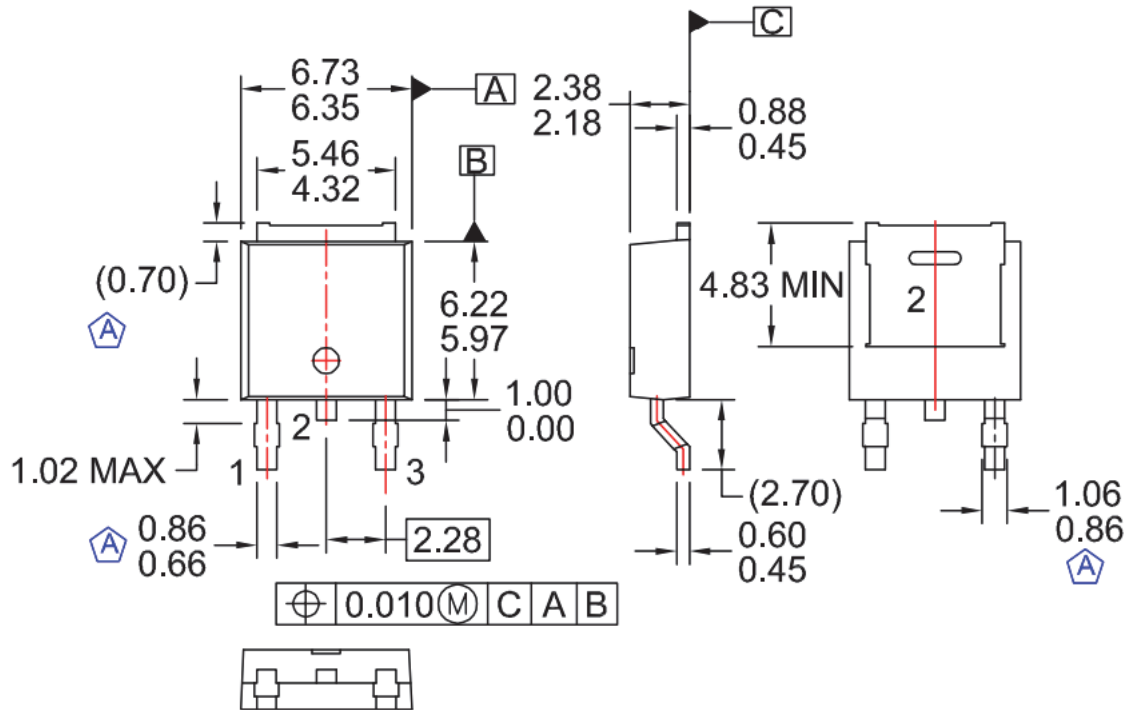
TO252 (D-PAK), Molded, 3 Lead, Option AA&AB
